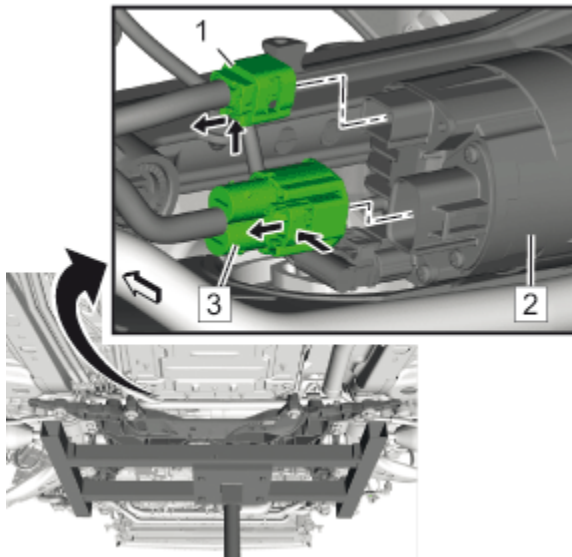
Power Steering Assist Motor And Electrical Connectors
